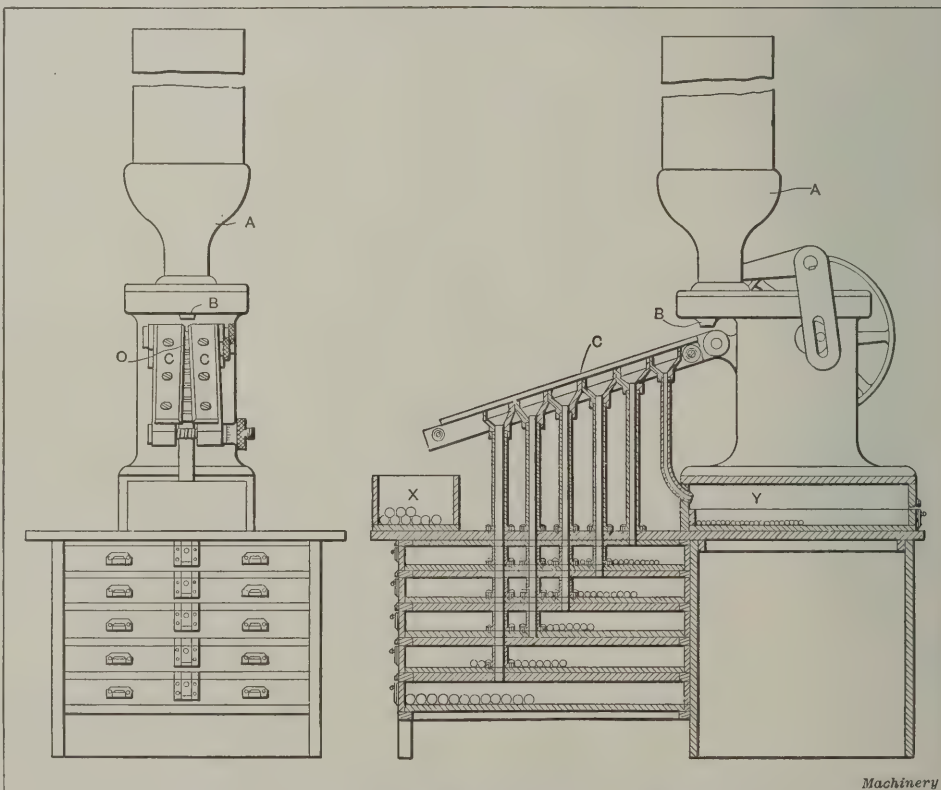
The Grant Ball Measuring Machine—U. S. Patent No. 583,456
